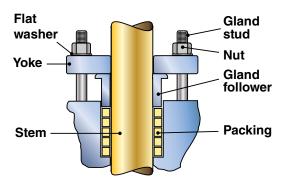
This cross-sectional view shows a typical valve-stem sealing assembly
